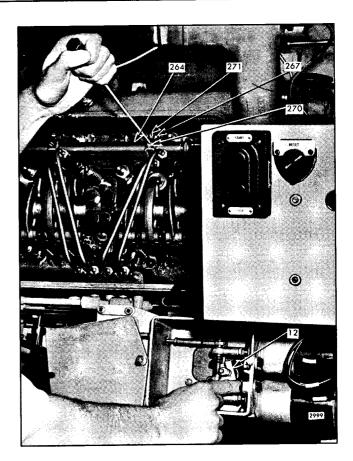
Positioning No. 6 Injector Rack Control Lever (Current 62806RD and 62808RD Models)
